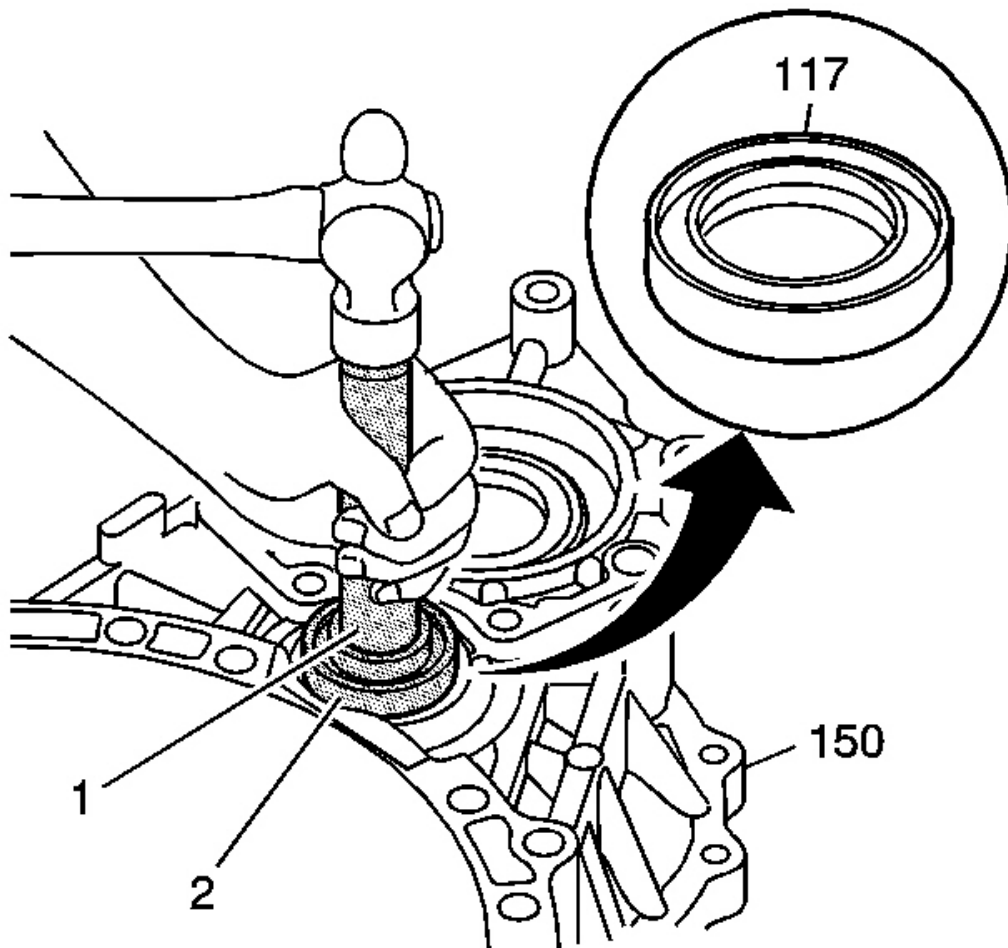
Installing The Front Wheel Drive Shaft Fluid Seal Using DT 46428 & EN 46342
